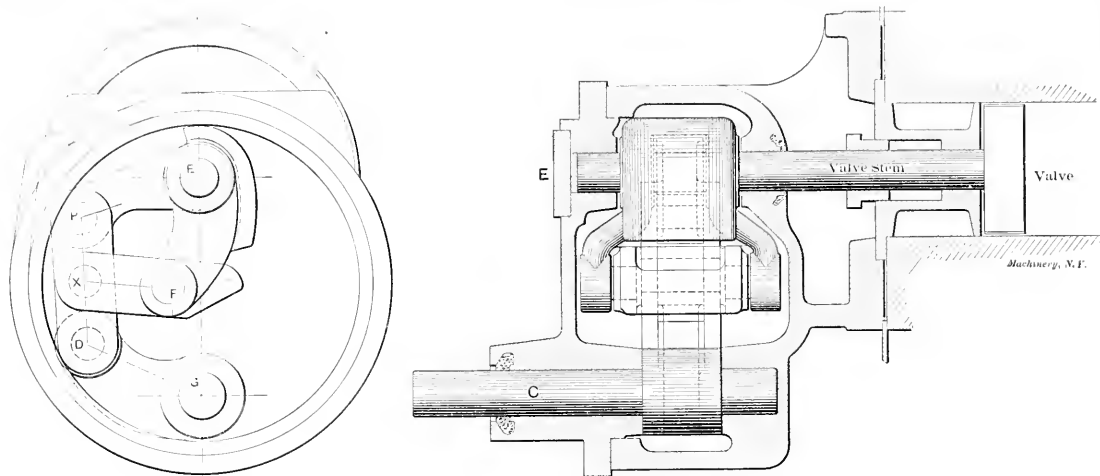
Arrangement of Levers and Section of Bonnet and Valve Gear Chamber, the latter containing Oil.
